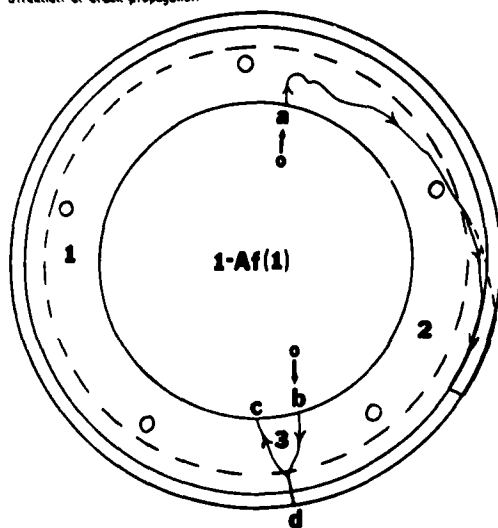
Fracture patterns in RBSN forward shroud after testing. The arrows labeled "o" indicate sites where fracture initiated.
